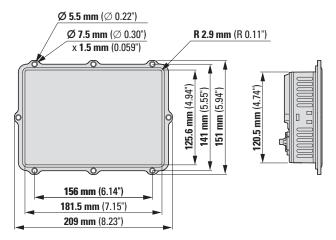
Dimensions for 7.0" rear (panel) mounting devices in mm (inches)XV-313-..-...-A11-..
